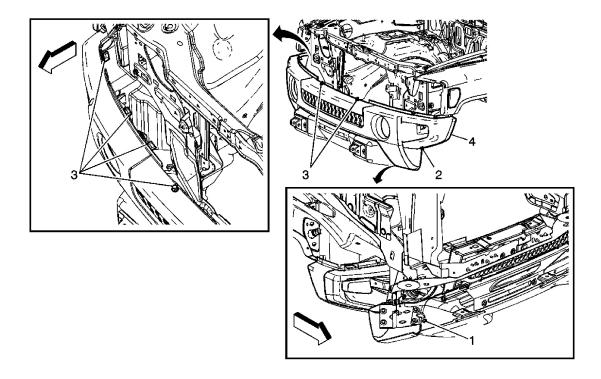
Replacing Front Bumper Fascia Courtesy of GENERAL MOTORS CORP.
